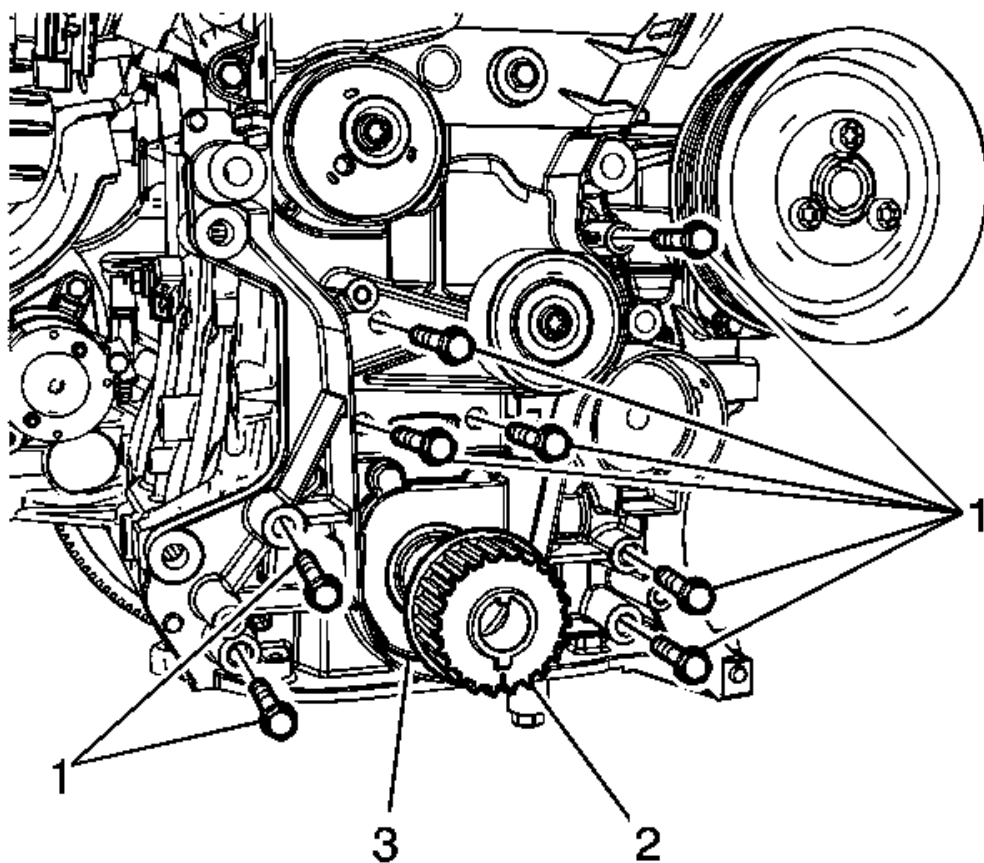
Crankshaft Sprocket & Engine Front Cover Assembly
